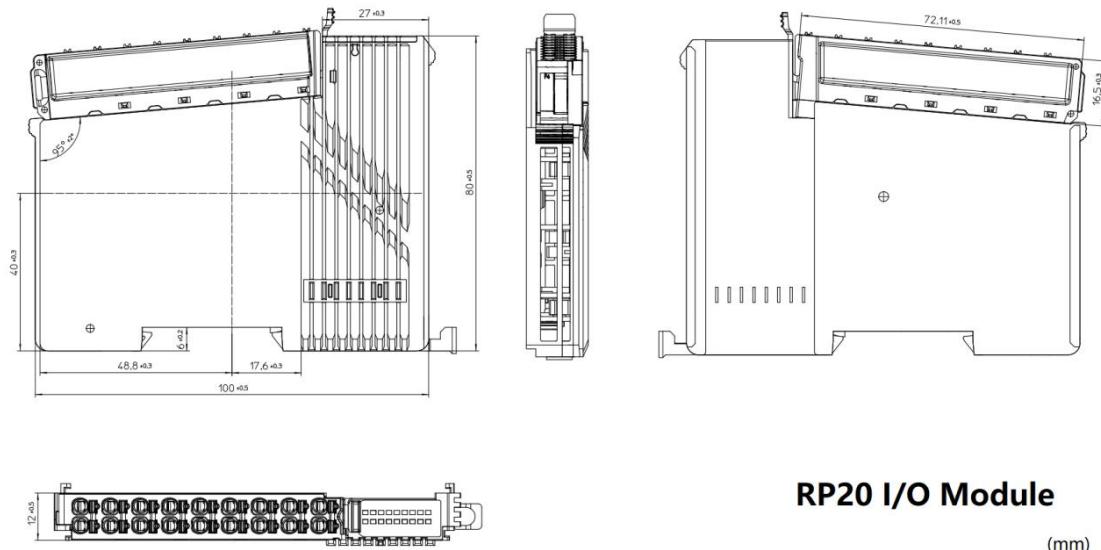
RP20 series I/O modulesAssembly dimension drawing
